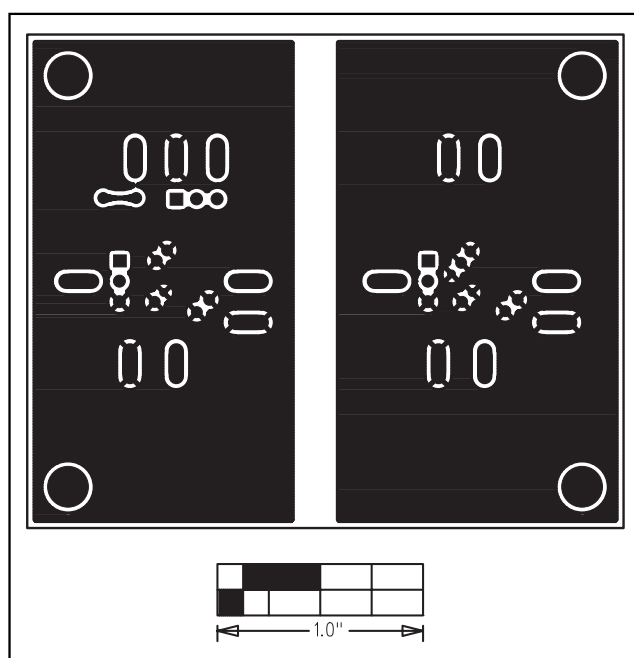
MAX8530/MAX8531 EV Kit PC Board Layout—Solder Side
